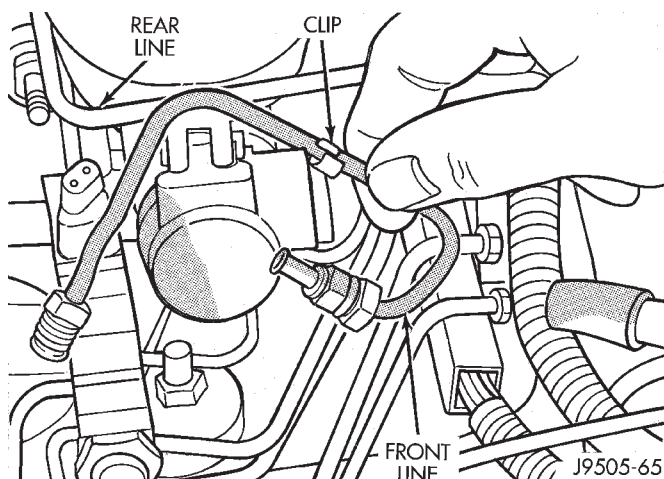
Master Cylinder Front Brakeline Removal/Installation
